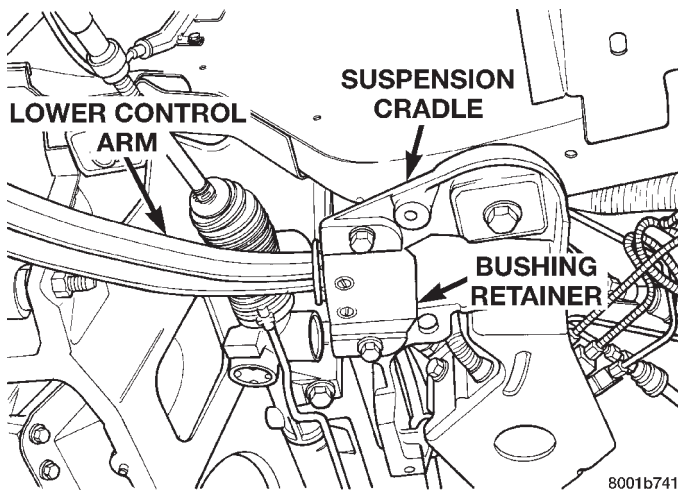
Control Arm Bushing To Suspension Cradle Retainer
